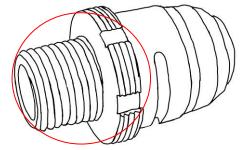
Drawing of a Forged Fire Suppression Sprinkler Part
